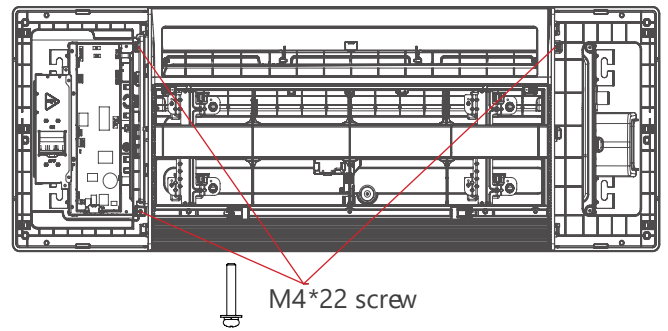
Open the Screw Cover to Access the Screws
